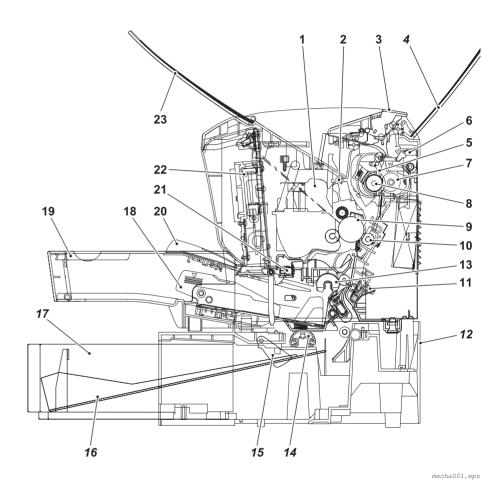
Sectional View of Mechanism (EPL-5900)
